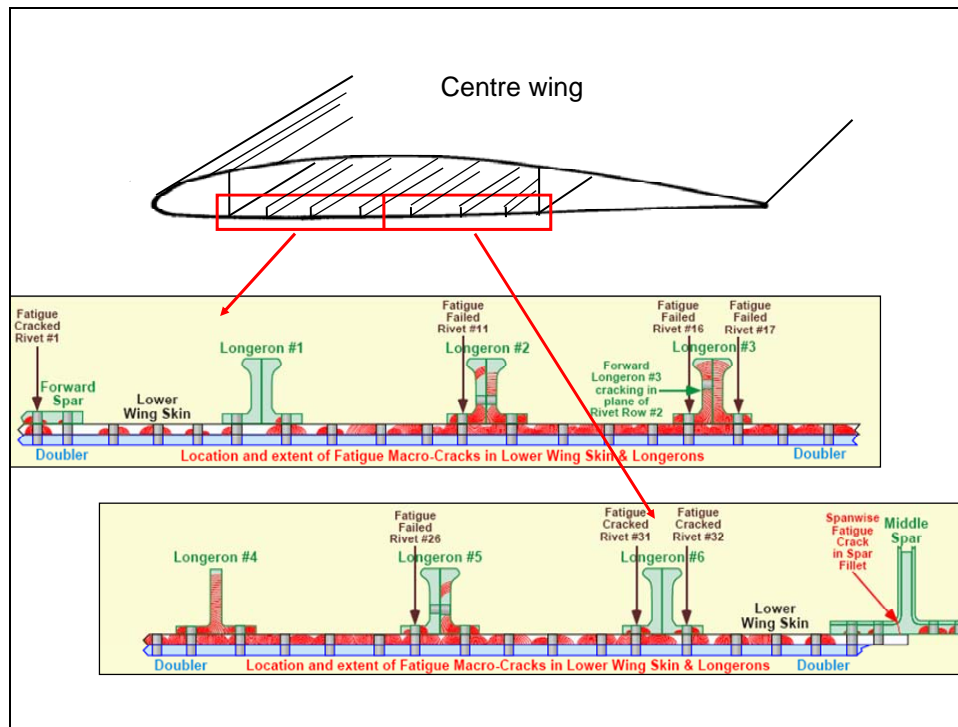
Fracture, with fatigue cracks marked in red
